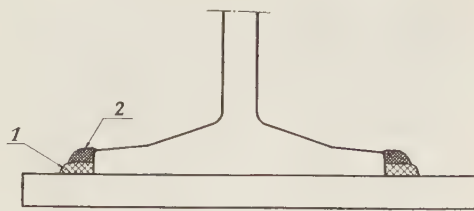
Two-run weld of a crossing rail foot on the bearing plate.
